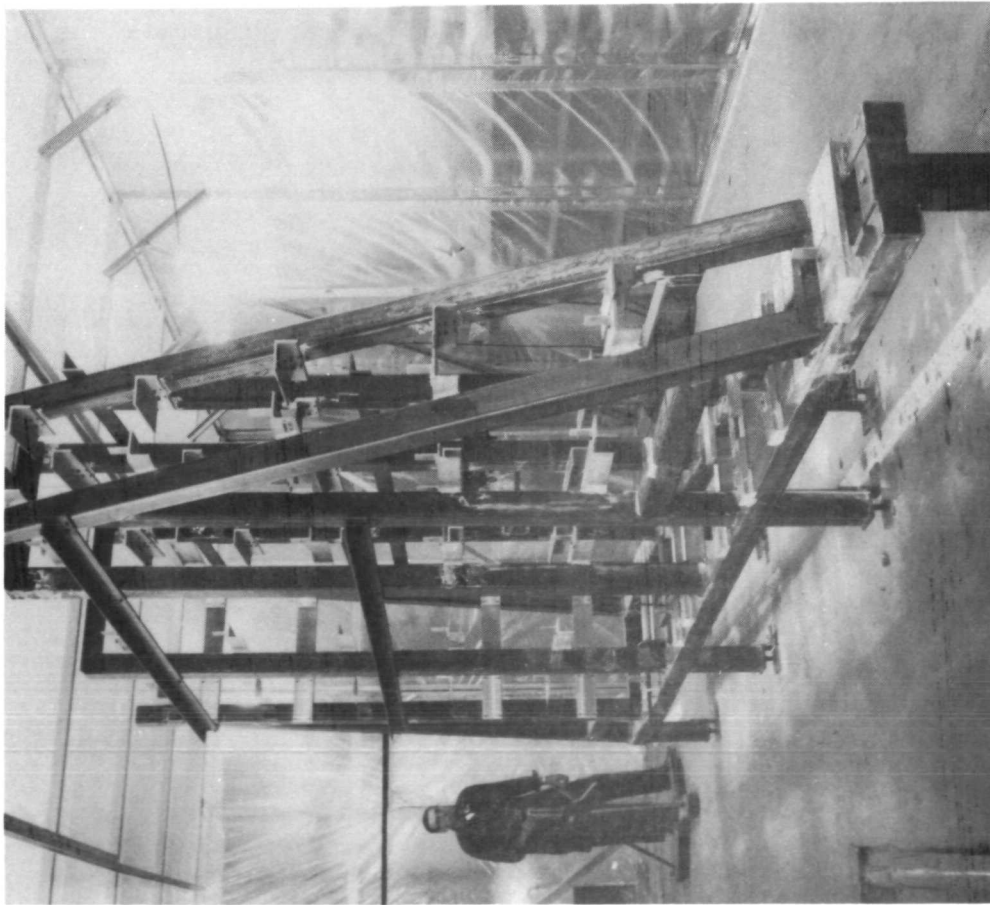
Final Assembly Fixture Structure Looking at Station and Butt Line Jig Points of Lower Wing Surface as Viewed from the Leading Edge Outboard
